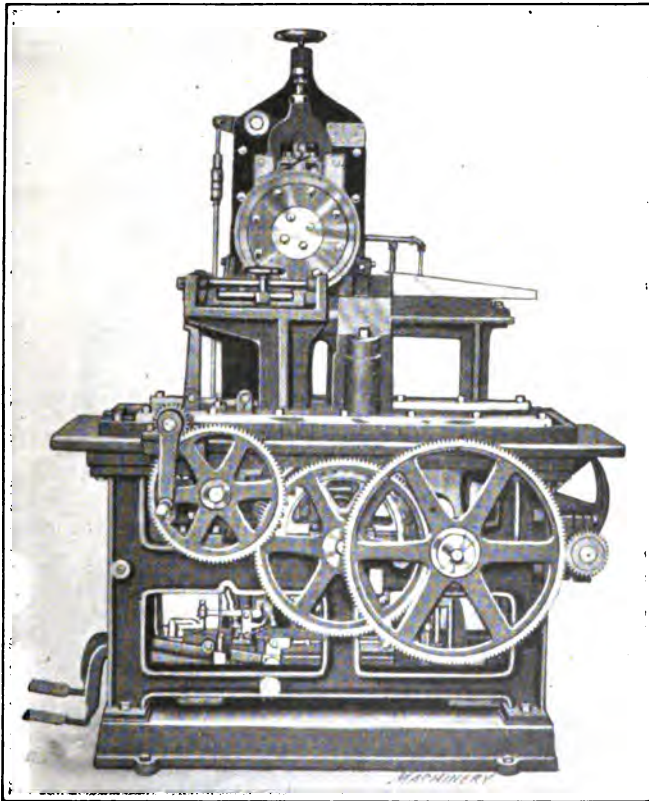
Special Butt-seam Welder built by the Thomson Electric Welding Co. for Seam-welding Tubing at the Rate of from 20 to 30 Feet per Minute
